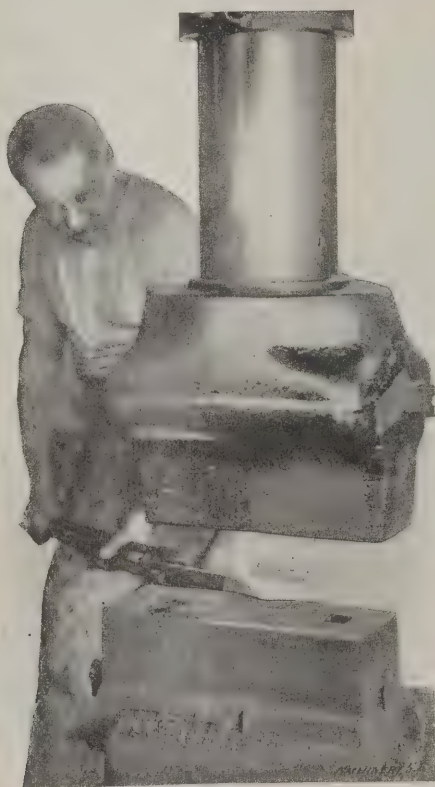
Heel of Tool being Drawn Down under Steam Hammer.
